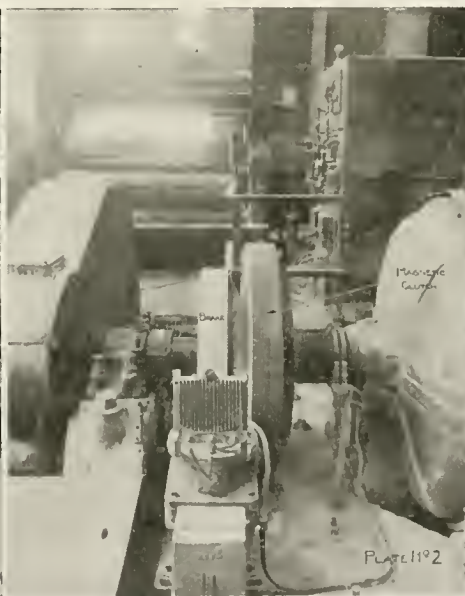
ELECTRICAL WIRING FROM MILL SWITCHES SHOULD BE CARRIED IN CONDUITS
